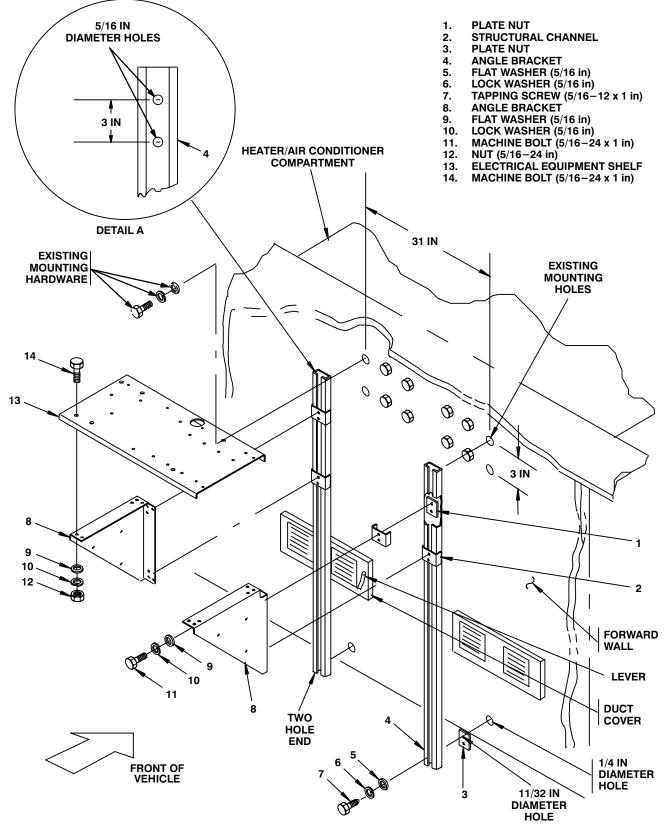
(1). Electrical Equipment Shelf Installation: Typical Installation
